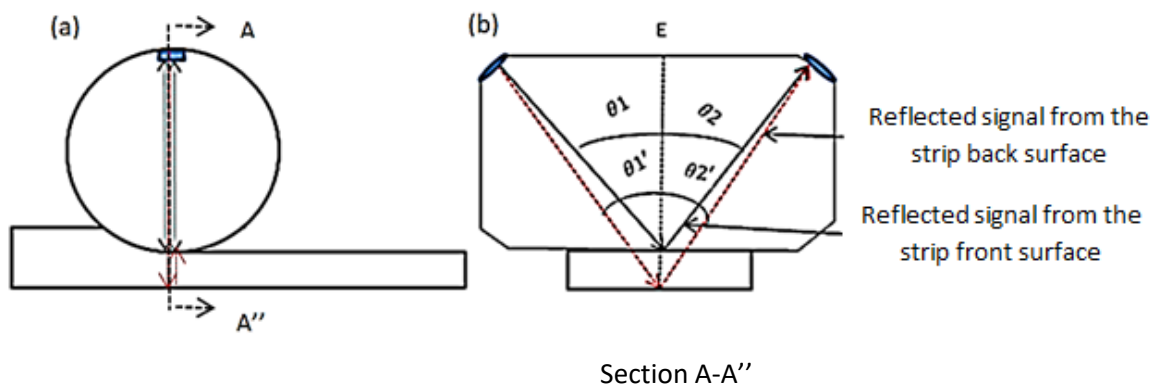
(a) Side and (b) front view when the sensor is over the roll-strip contact
